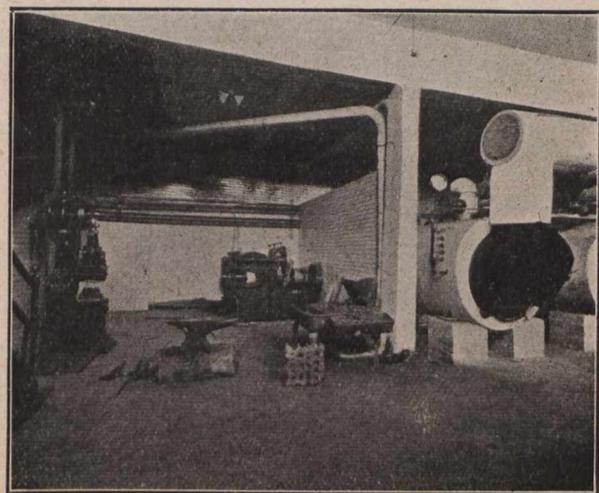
Boiler House and Smith's Shop, showing two marine type high pressure boilers, power hammer, shearing machine and "Buffalo" down draught forge.
